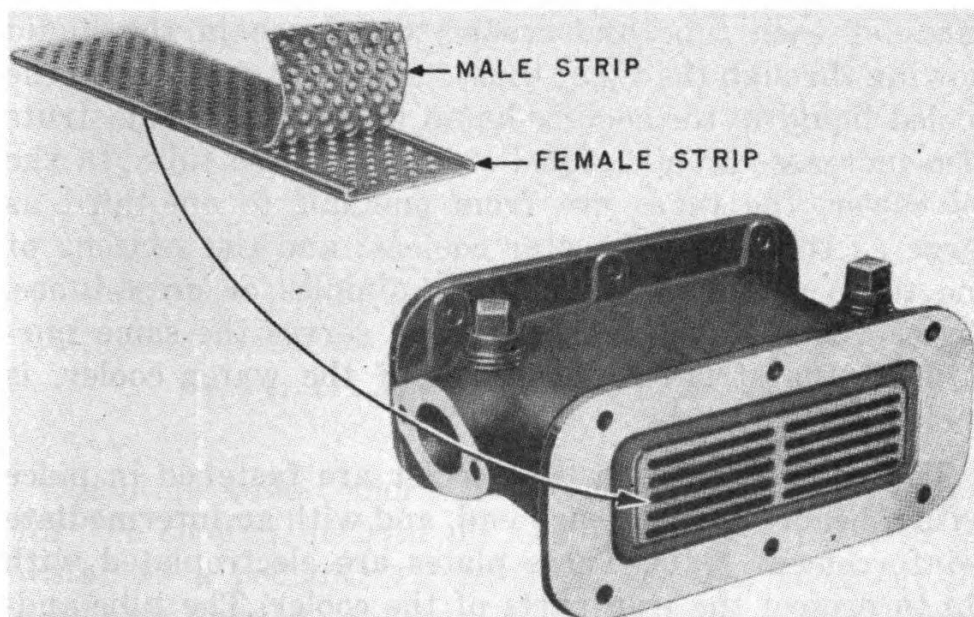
Tube assembly of a strut-tube water cooler (Harrison).
